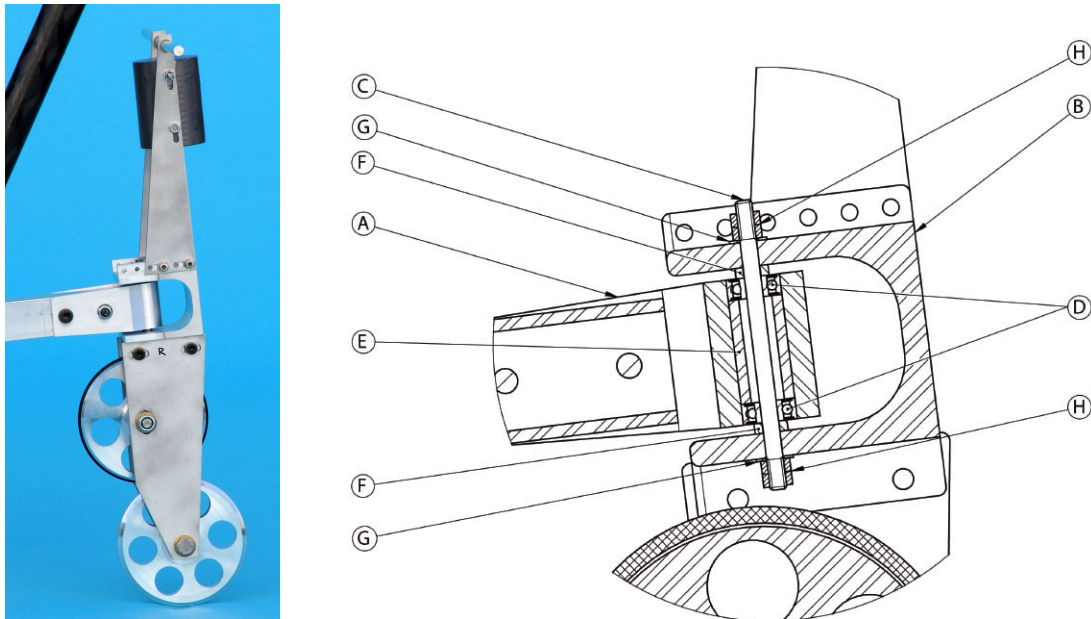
left) Side view of the front assembly of the experimental TMS bicycle. right) Front frame and steering head cross-section. (A) Rear frame head bracket, (B) Front frame head bracket, (C) Dowel with threaded ends, (D) Bearings, (E) Glued bearing spacer, (F) Spacer, (G) Washer, (H) Nuts.
